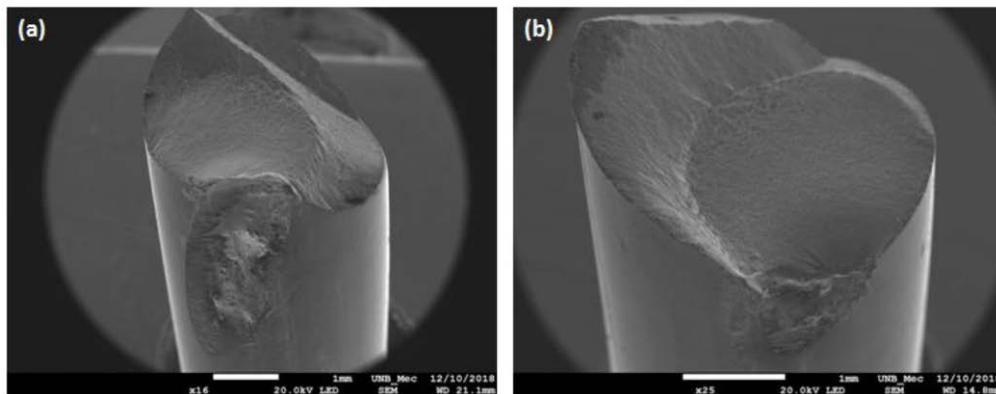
Mark of the failure onset due to fatigue under fretting conditions in the wire-wire contact, both in the lower (a) and in the upper (b) piece of the same aluminum wire tested.
